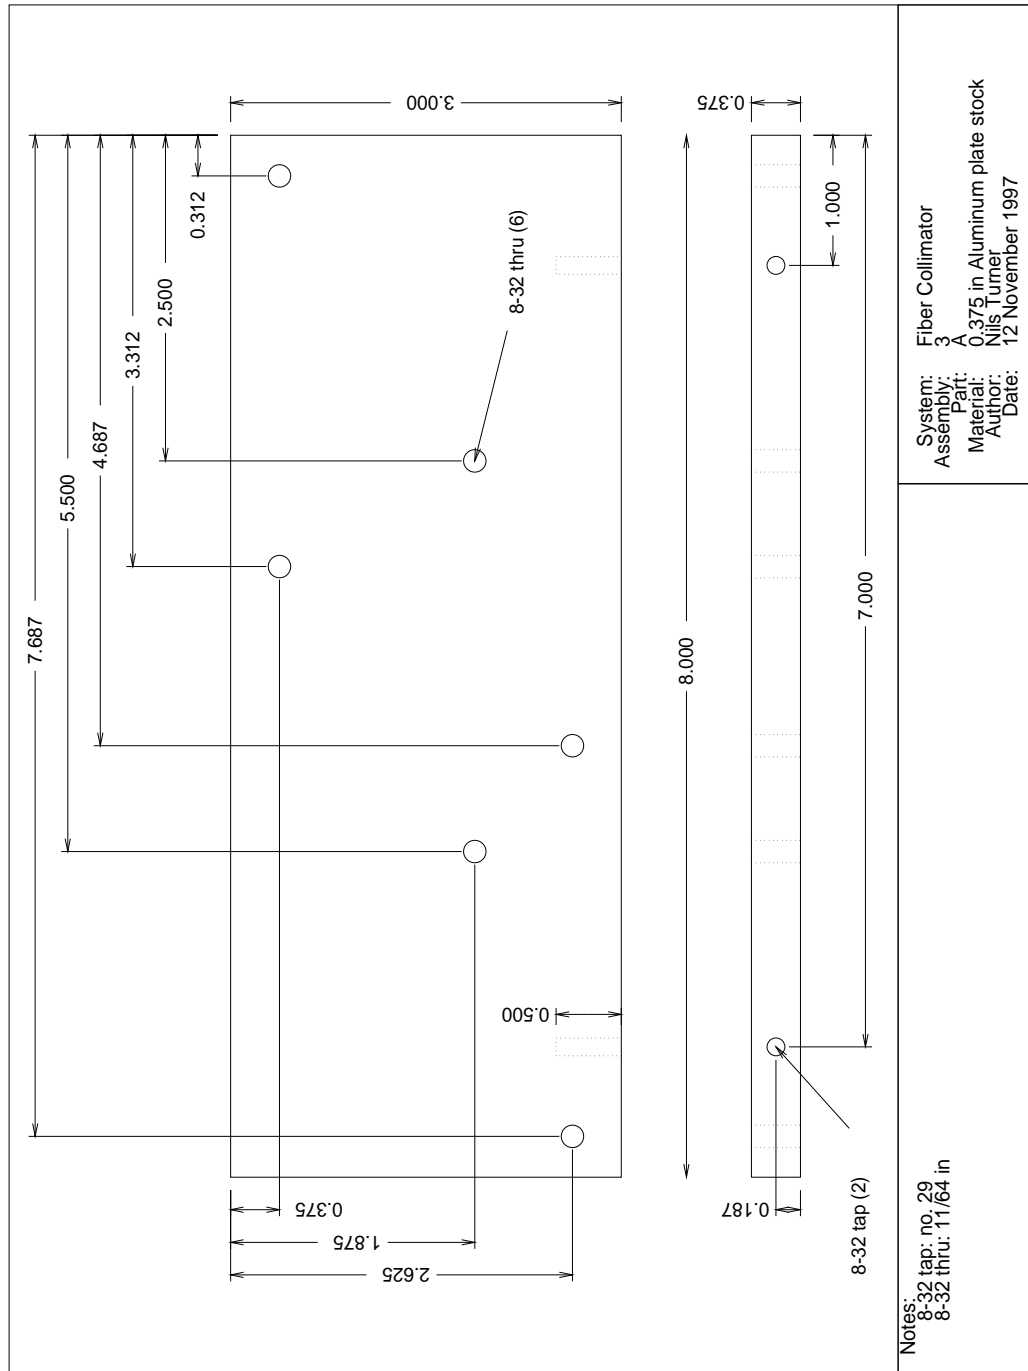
Fiber Collimator, Part 3A*. This part provides a base for the assembled parts in Assembly 1 and Assembly 2, staggering the X-Y-Z translation stages for a close packing.
